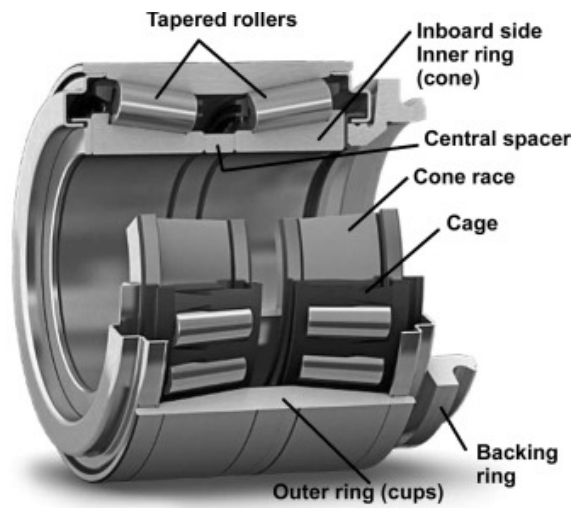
Typical railroad tapered-roller bearing assembly [1]
